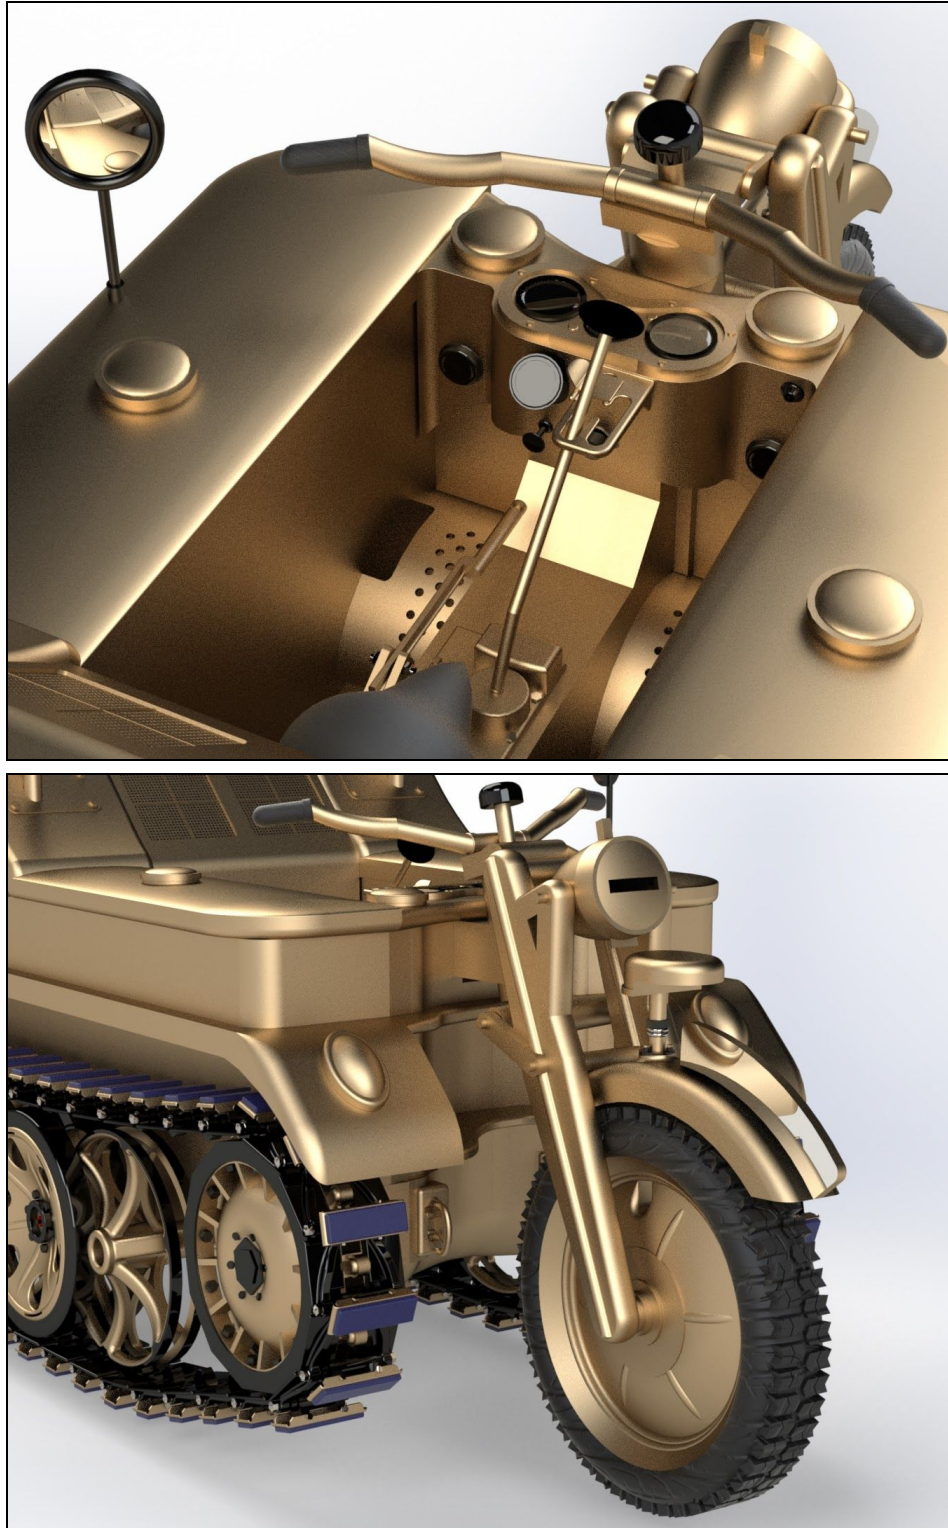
& 6. The driver view of the Kettenkrad Sd. kfz2.
